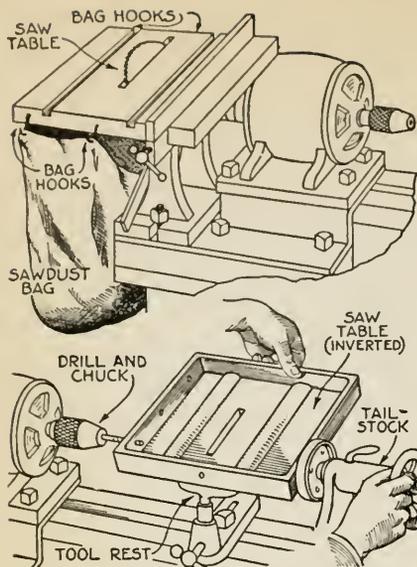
The sawdust bag in place (upper view); and how the holes for the hooks are drilled.
